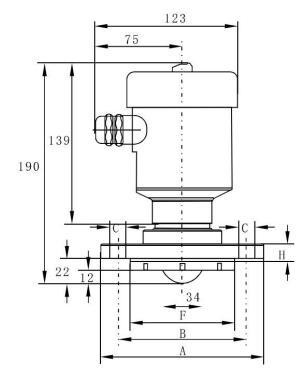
Dimensional Drawing of High-Temperature Universal Flange Structure (Unit: mm)
